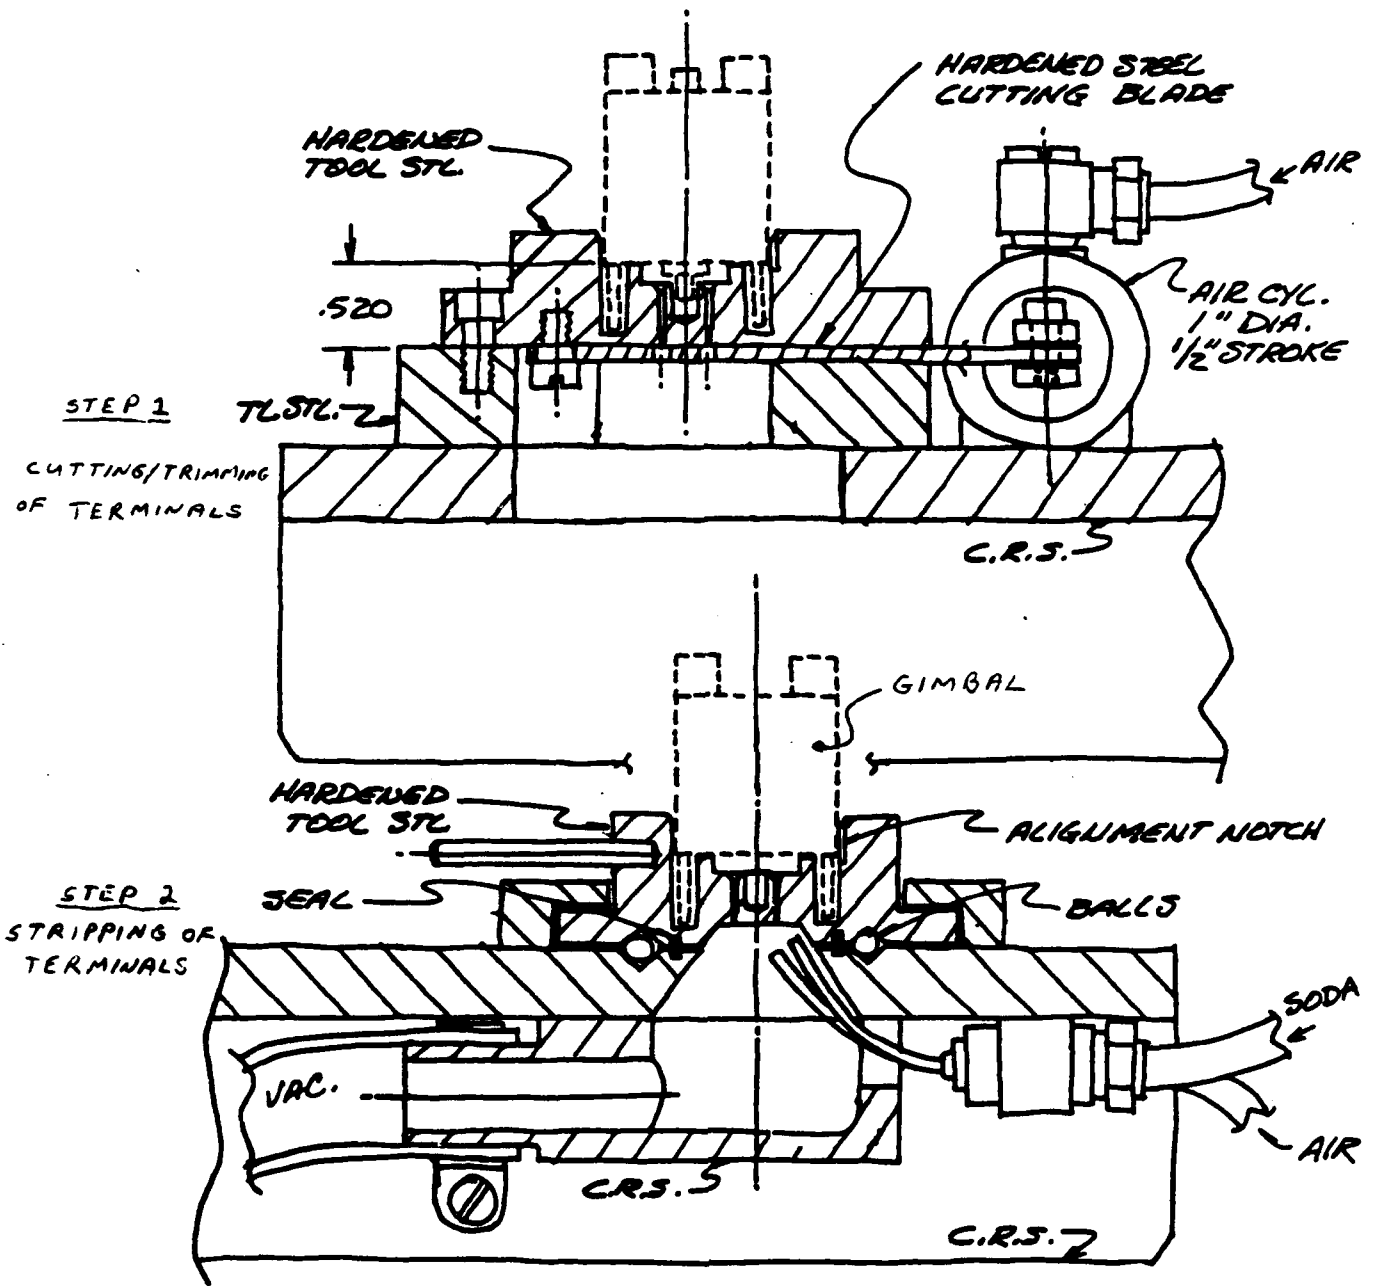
Integrated Terminal Trim and Stripping Tool (Gimbal Subassembly GG1111)
